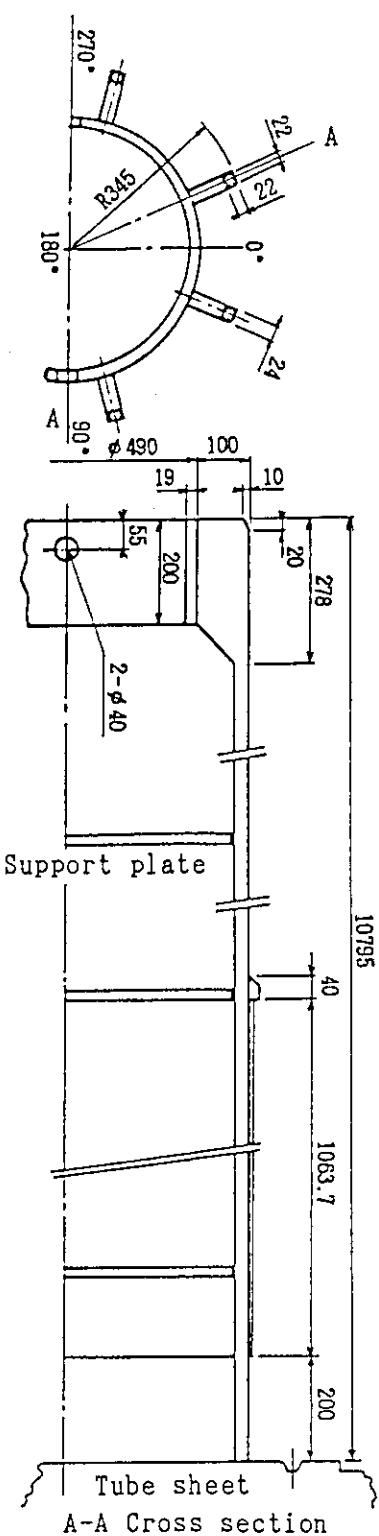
(b) Guide Bar Assembly of U-tube Bundle
